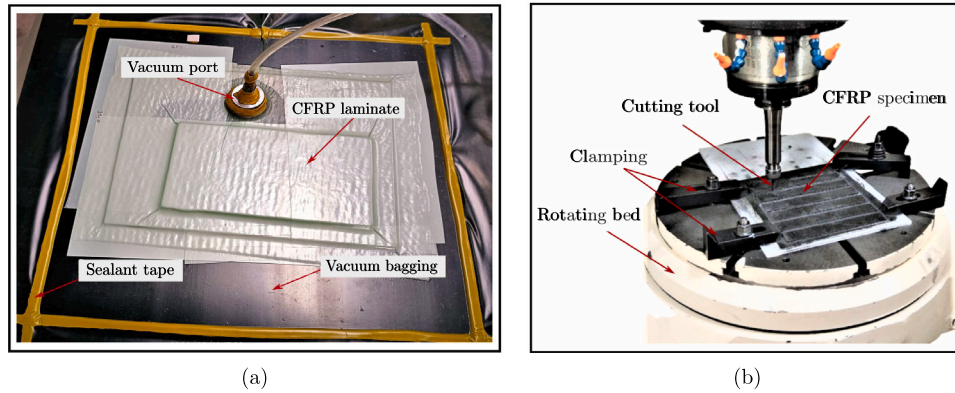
Specimen fabrication process: (a) vacuum bagging process and (b) machining of the laminate.
